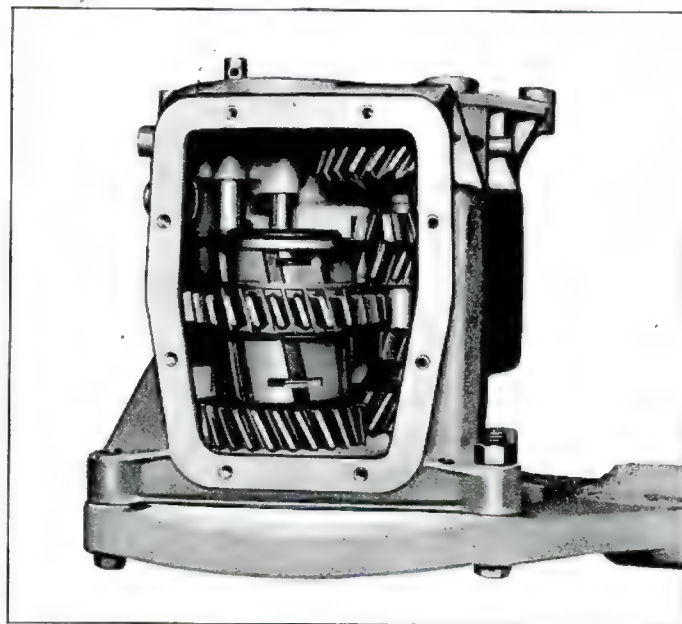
A-26—Second and Third Speed Clutch, Sliding Gear and Second Speed Gear Installed
